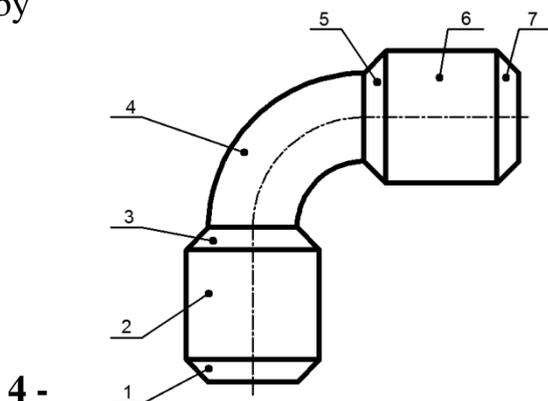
Compression removal part made of carbon composites. 1, 3, 5, 7 - conical chamfers, 2, 6 - cylindrical surfaces, part of Torus surface.
